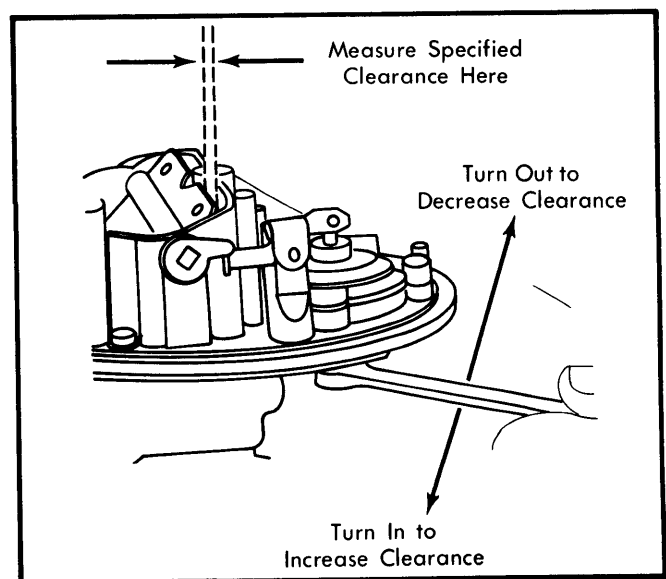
Adjusting Choke Valve Pull-Down Clearance (Model 2100 Carburetor Only)
